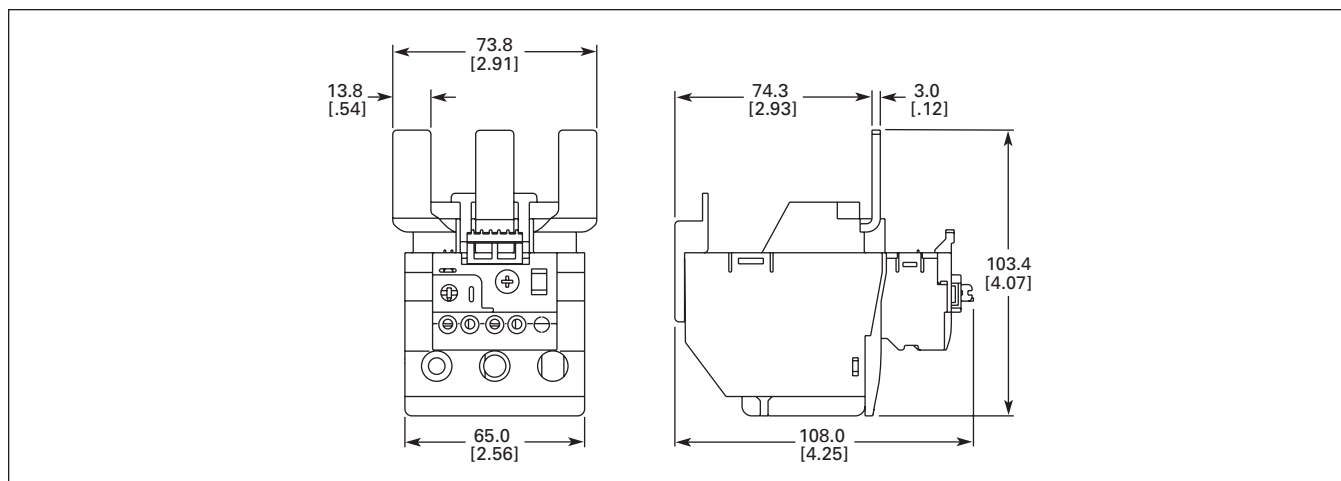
65 mm C396 (22 – 110A) Direct Connect to XT Frame F – G Contactor — Approximate Dimensions in mm [in]
